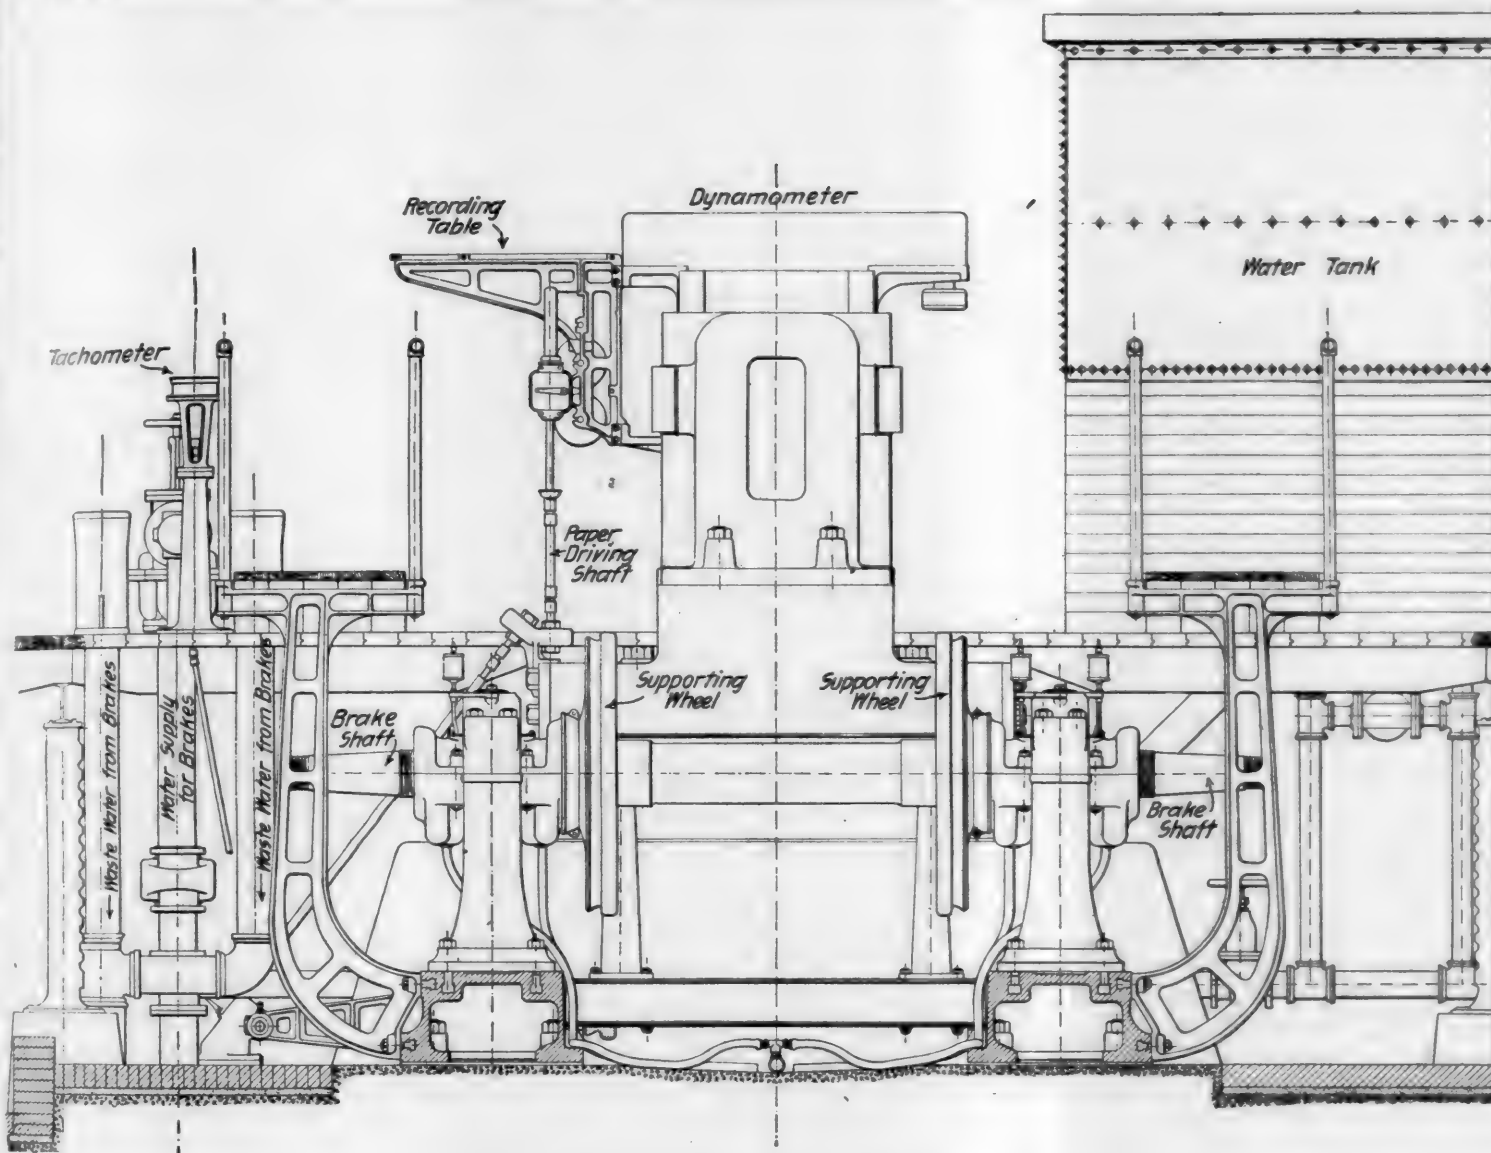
END ELEVATION OF LOCOMOTIVE TESTING PLANT.
